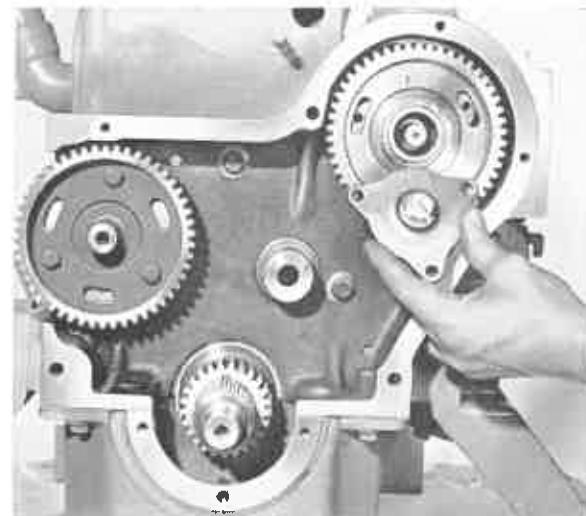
Removing Fuel Pump Gear Adaptor.
